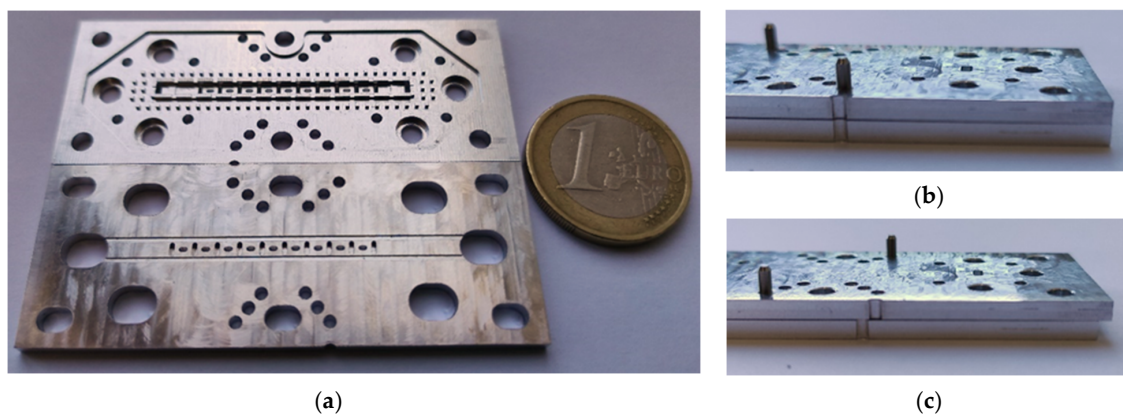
Manufactured single-periodic prototype. (a) Inner view of top and bottom pieces, (b) pieces in glide-symmetric configuration and (c) pieces in broken symmetry configuration.
